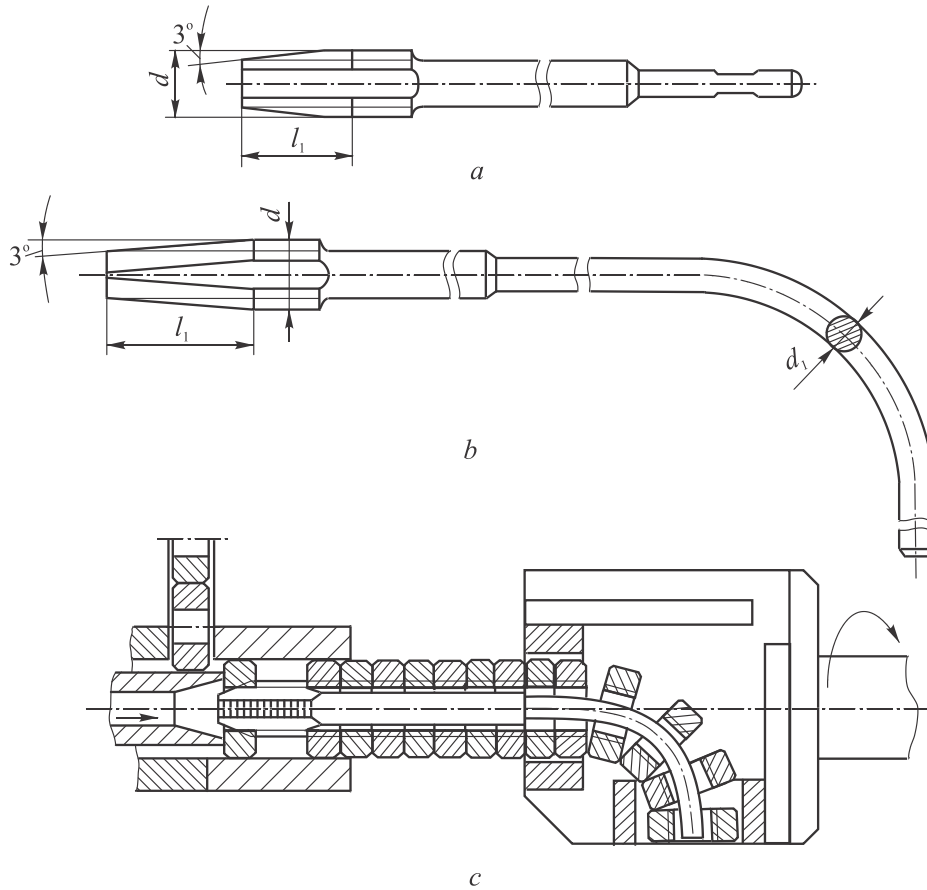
Nut tap: (a) with a straight shank; (b) with a bent-shank; (c) operation
